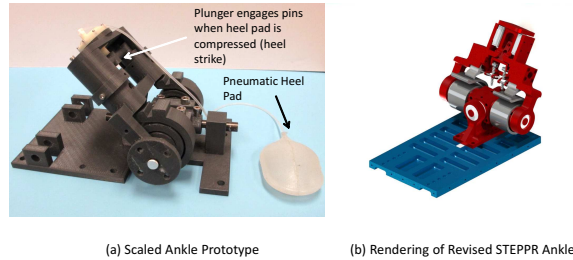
A photograph (a) and rendering (b) of proposed ankle engagement designs.
